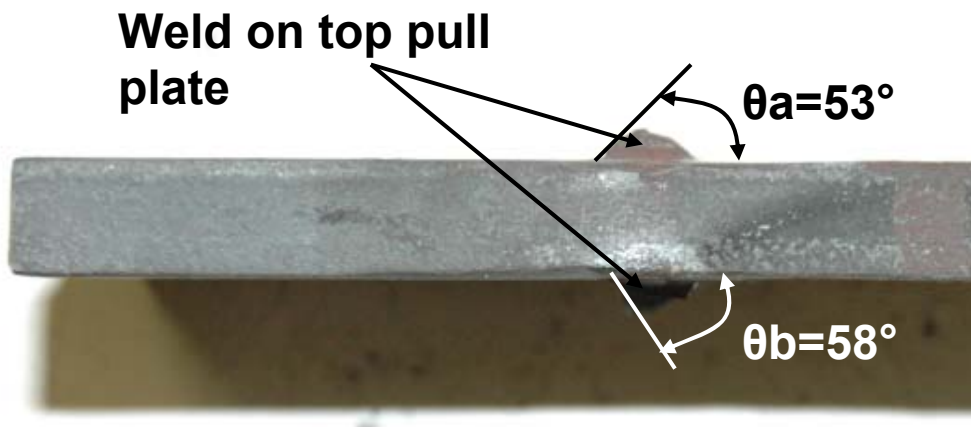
Photograph of a side view Specimen P3, where the profile of the fractured weld on the top pull plate is visible
